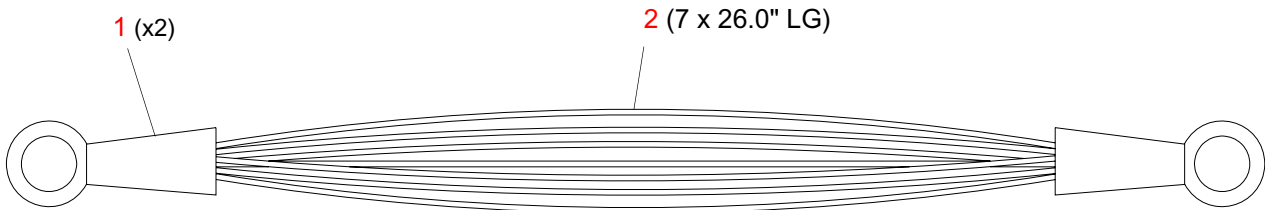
Chassis To Yoke Ground Cable Assembly
